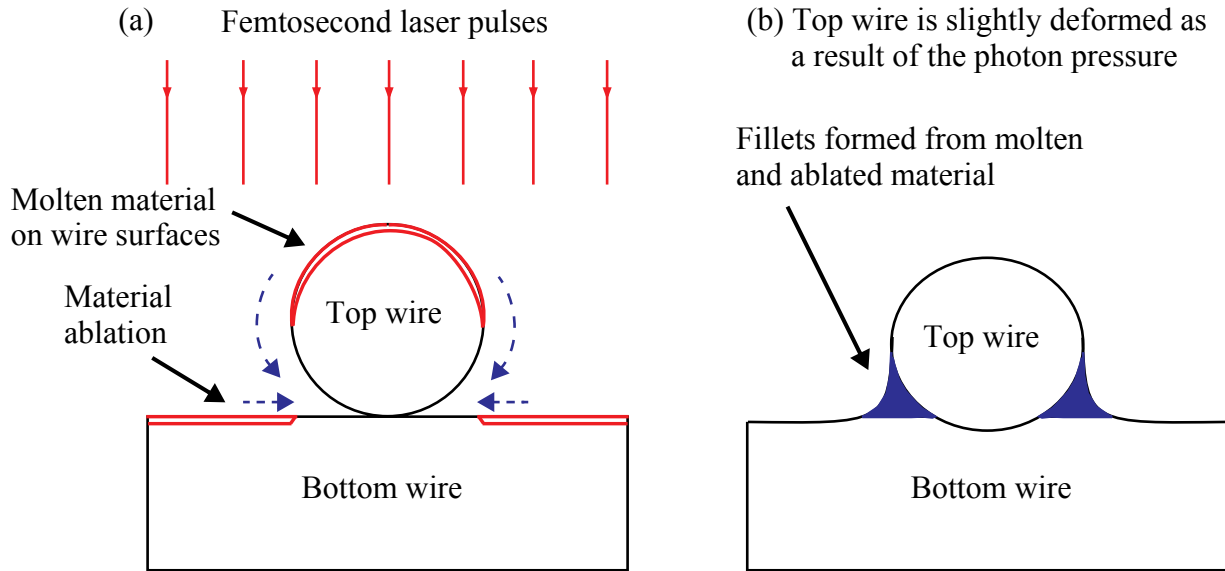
Broad beam joining mechanism for the microwelding of Au crossed-wires. (a) Femtosecond laser pulses melt the exposed surfaces of the wires. The blue dashed arrows show the molten material (top wire) and the ablated material (bottom wire) travelling to the crevices between the crossed-wires due to surface tension and gravity after laser irradiation. (b) A fillet joint is formed between the crossed-wires.
